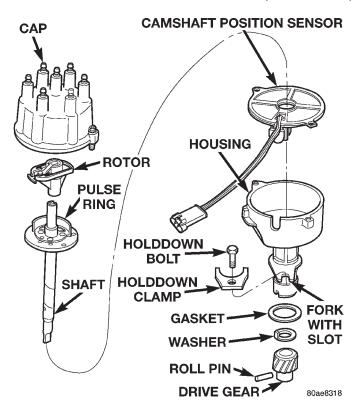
Distributor—2.5L Or 4.0L Engines—Typical
